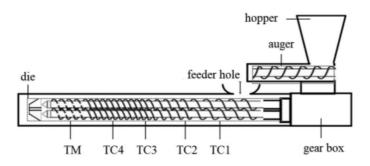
Schematic modular barrel and screw profile of twin screw extruder (Berto Industry BEX-DS-2256). TC = groove transfer direct pitch element (TC1 = 300 mm, TC2 = 220 mm, TC3 = 140 mm, TC4 = 120 mm), TM = groove mixing pitch element (80 mm), total long element = 800 mm.
